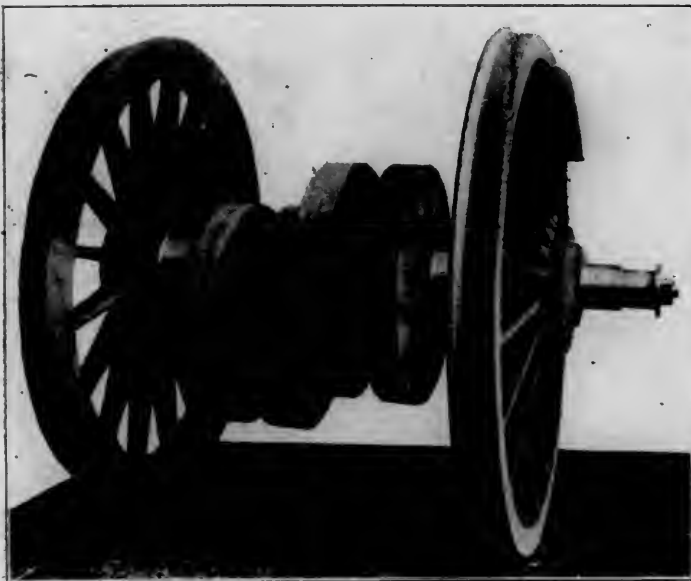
A.—BUILT UP CRANK AXLE WITH FOUR CIRCULAR CHEEKS AND FIVE PINS.
